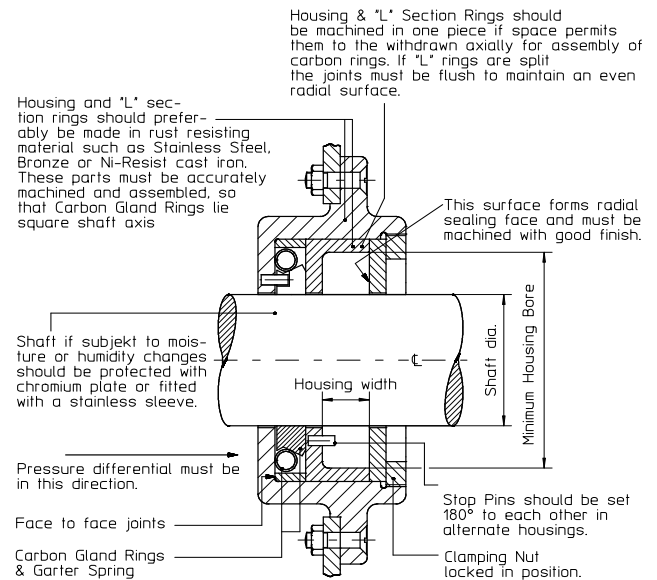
Bevel Section Carbon Gland Rings in Split Housing
